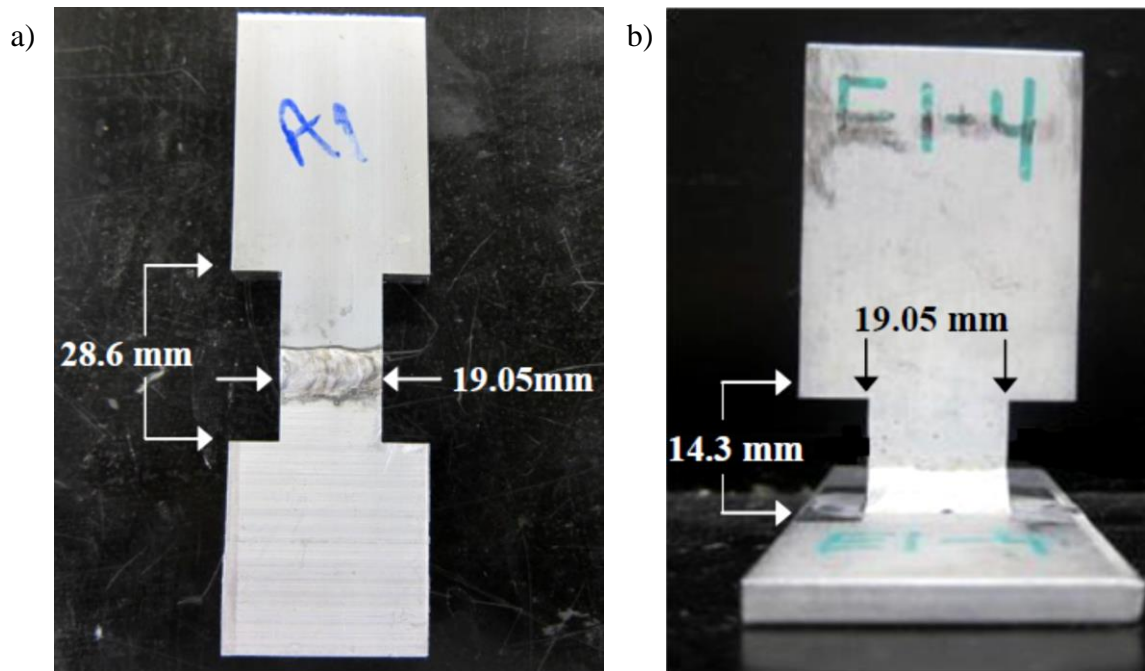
Modified (a) lap-joint and (b) T-joint weld sample geometries adopted for tensile-shear testing.
